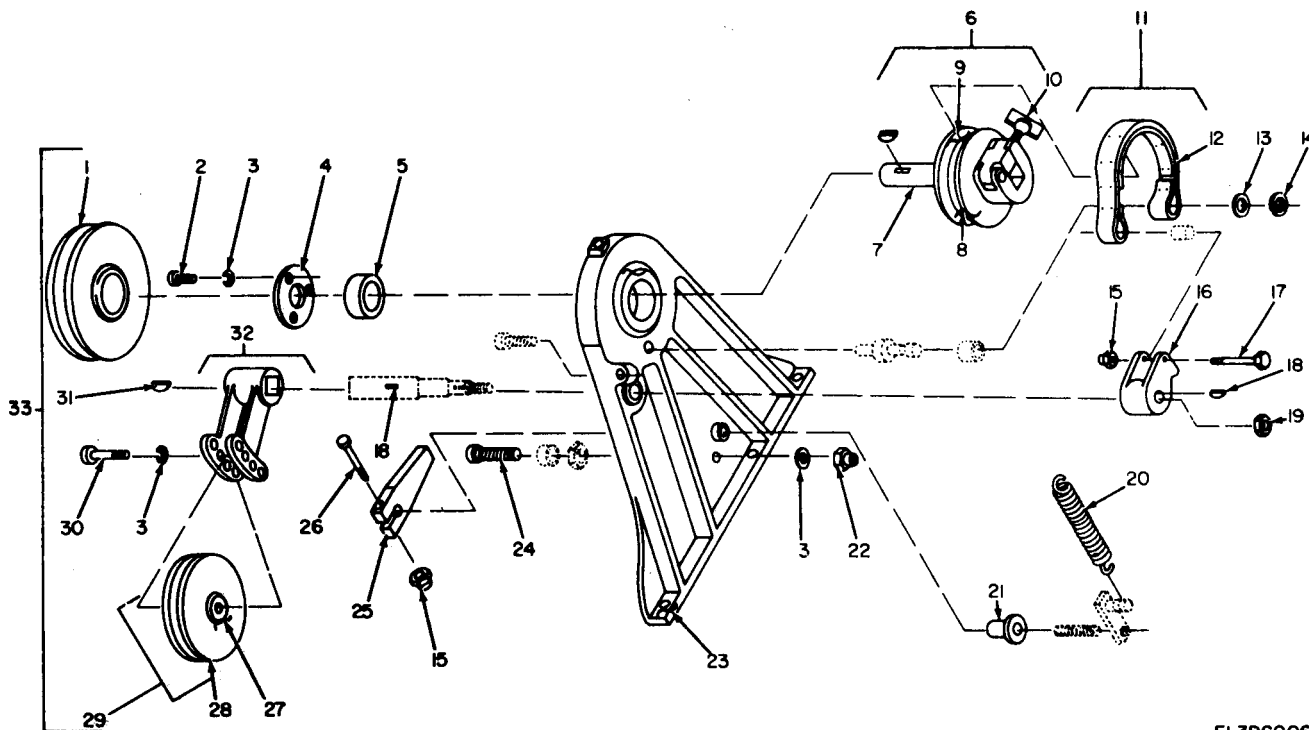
Reeling Machines, Cable, Motor Driven RL-172/G and RL-172A/G (Sheet 3 of 3).
